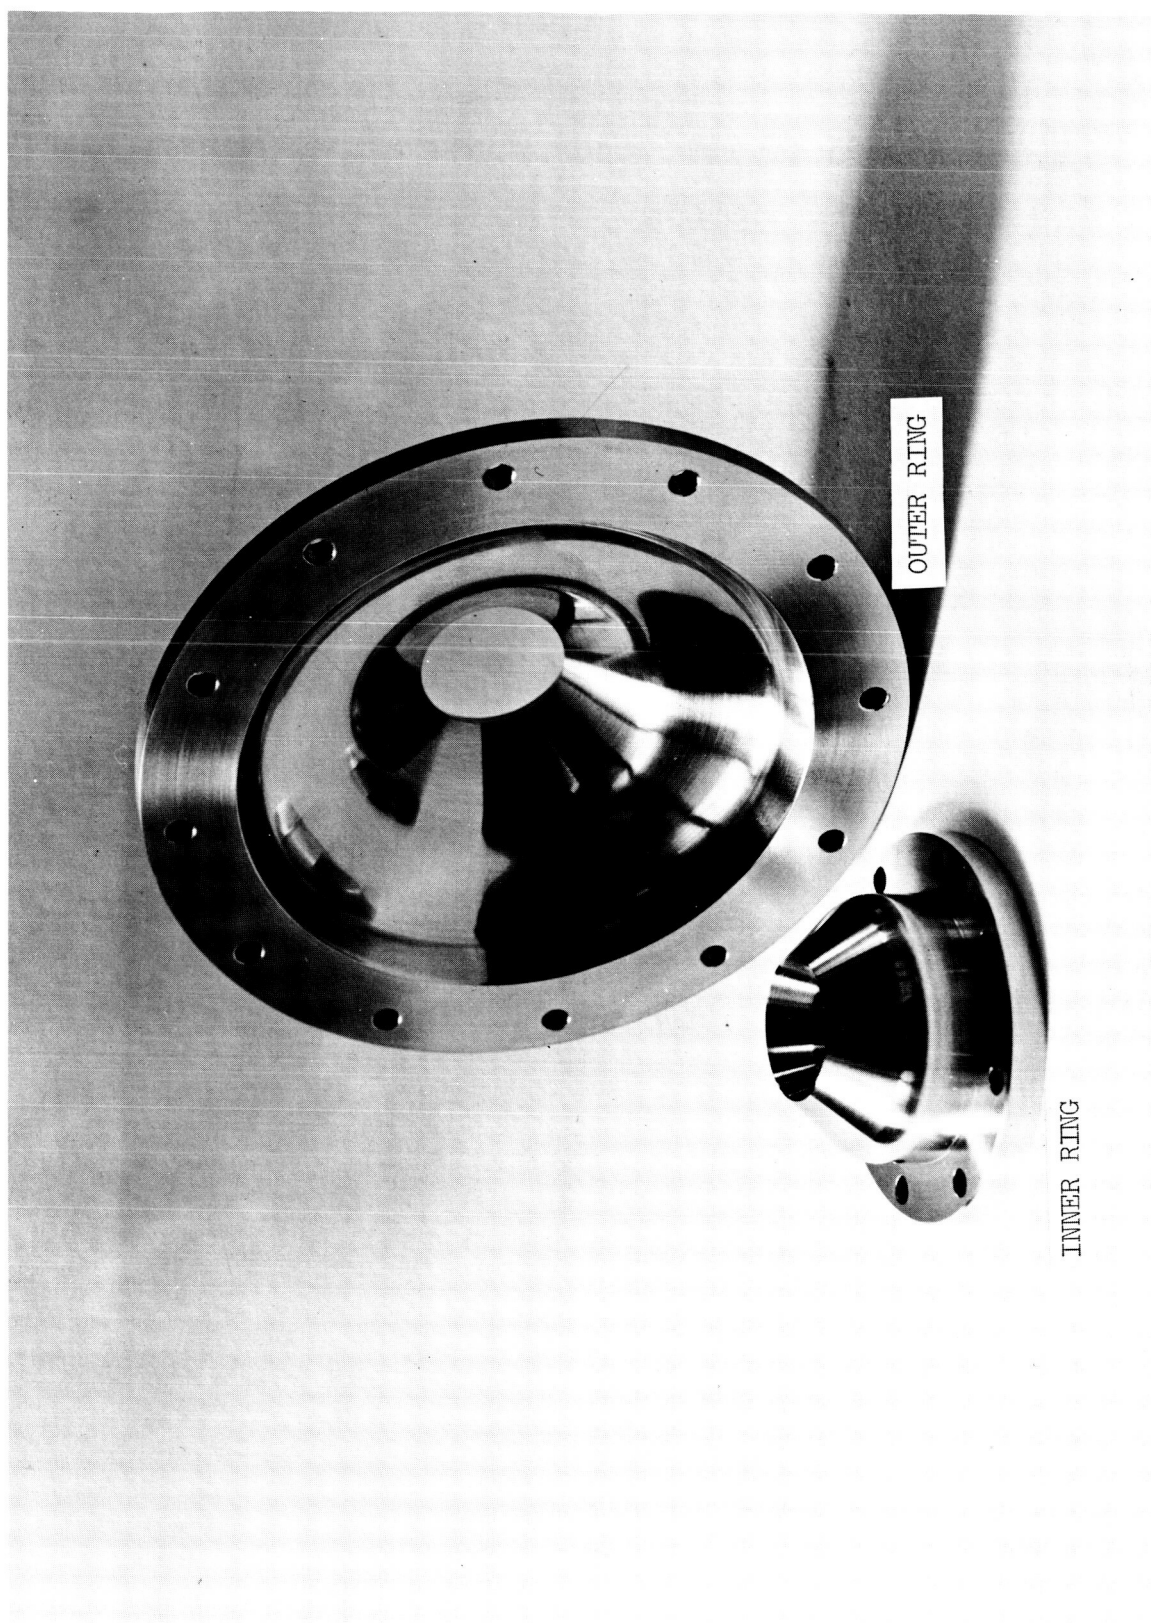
CONTROL JET NOZZLE RING SET FOR  $45^{\circ}$  IMPINGEMENT
